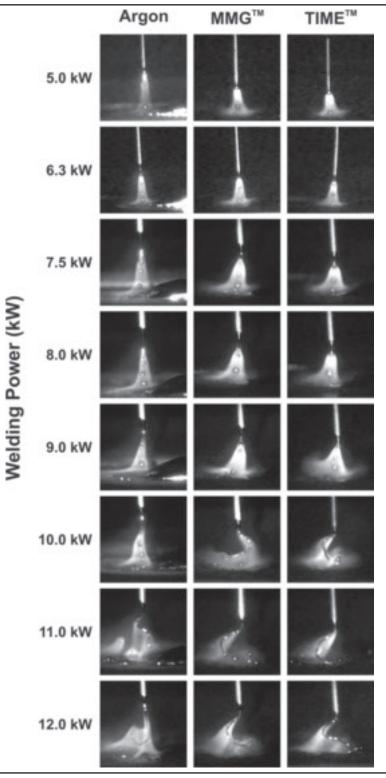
The filler metal transfer modes as a function of the welding powers and shielding gases. In these images, the diameter of the filler metal electrode wire is 0.9 mm.
